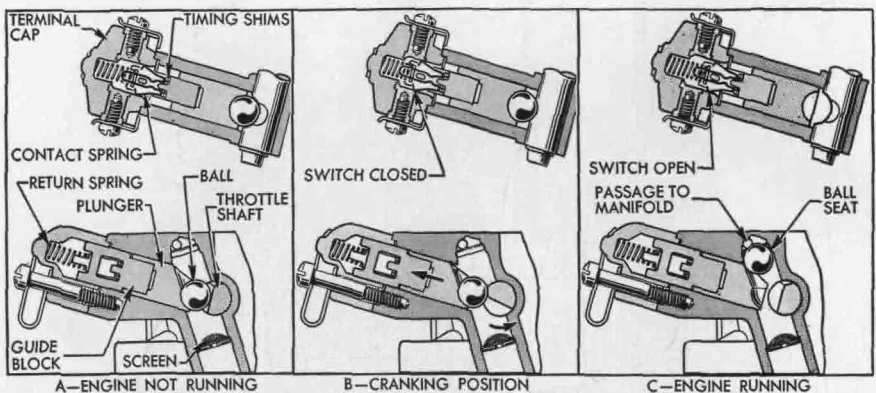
Ball-type vacuum-controlled switch showing three positions: with engine stopped, engine being started, and engine running. (Buick Motor Division of General Motors Corporation)
